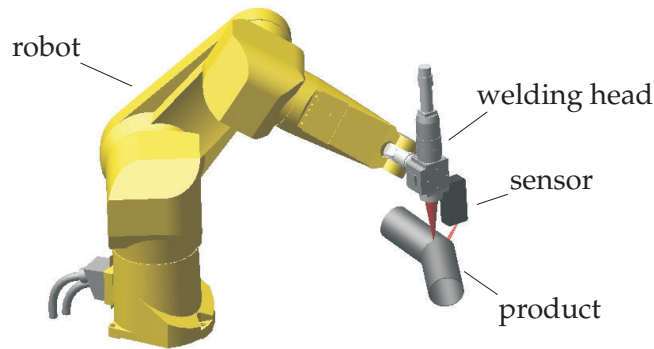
Laser welding system consisting of a robot, welding head, sensor and product.
